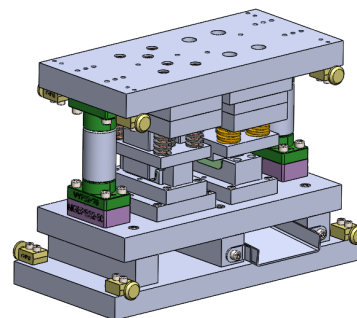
3D model of group tool Reinf-FR Towing Pipe.
